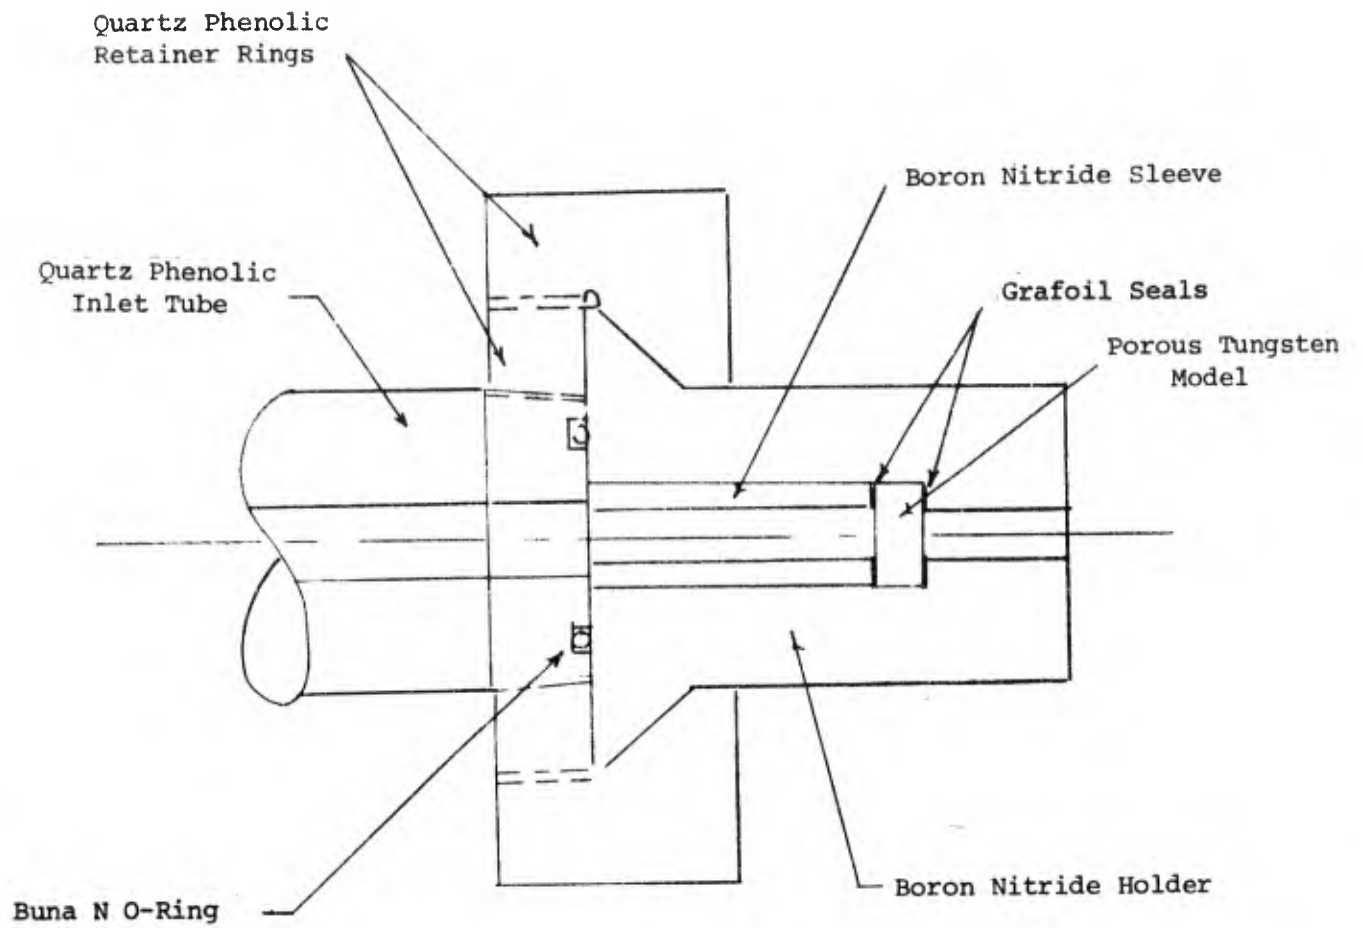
A. Heat Transfer Coefficient Test Fixture Assembly Drawing
